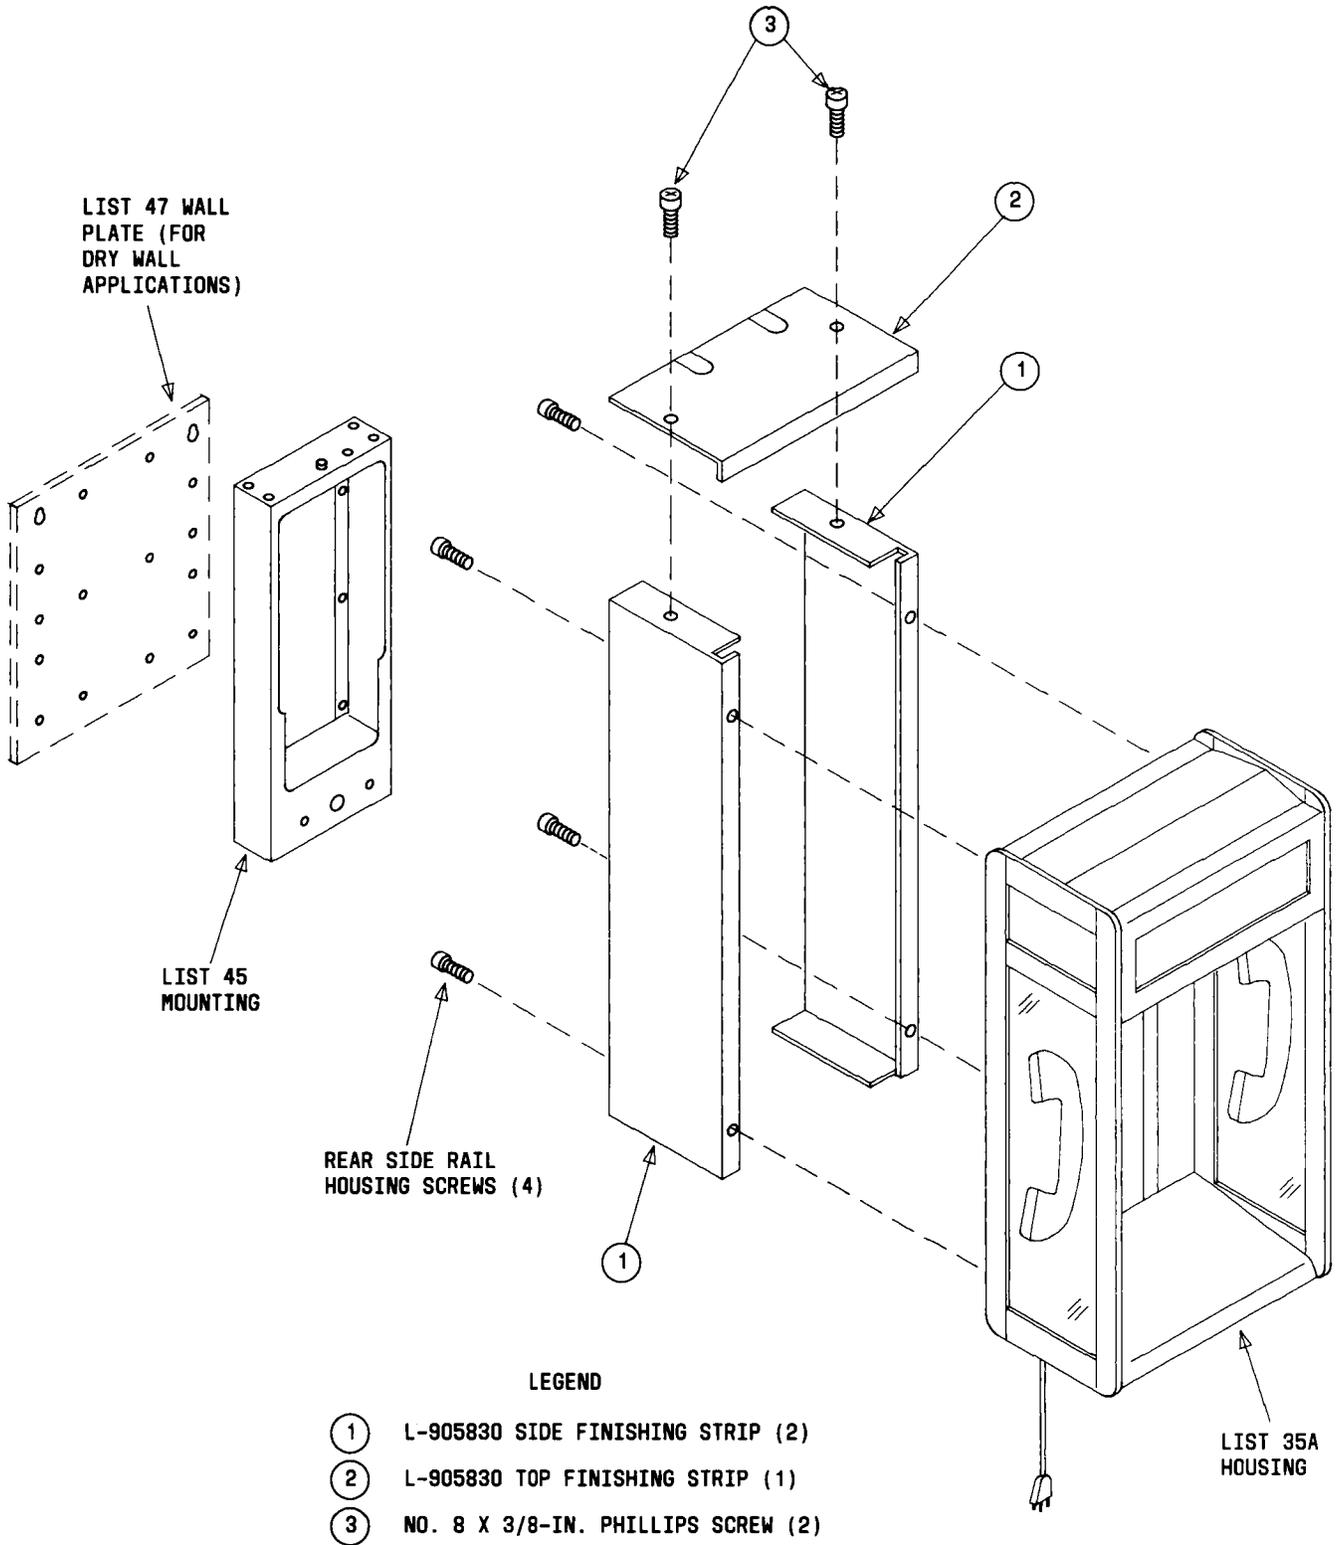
List 35A Housing Assembly With List 45 Mounting and List 62 Finishing Strip Kit
